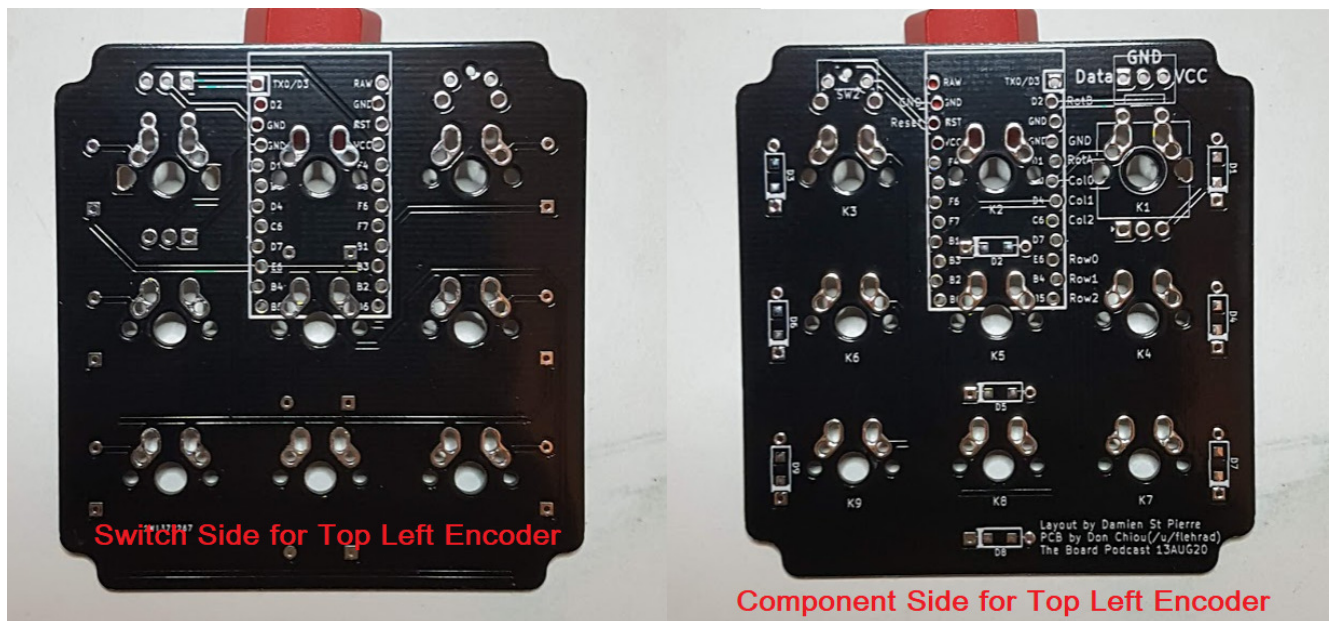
Switch and Component Side of PCB, Top Left Encoder layout.
